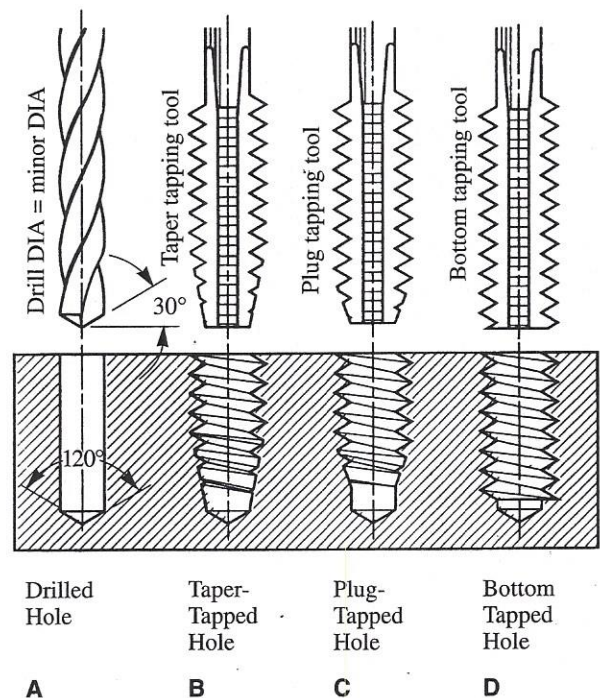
Taps are tools for cutting threads in holes. For blind holes the taper tap should be used first, followed by the plug tap, and then the bottom tap.
